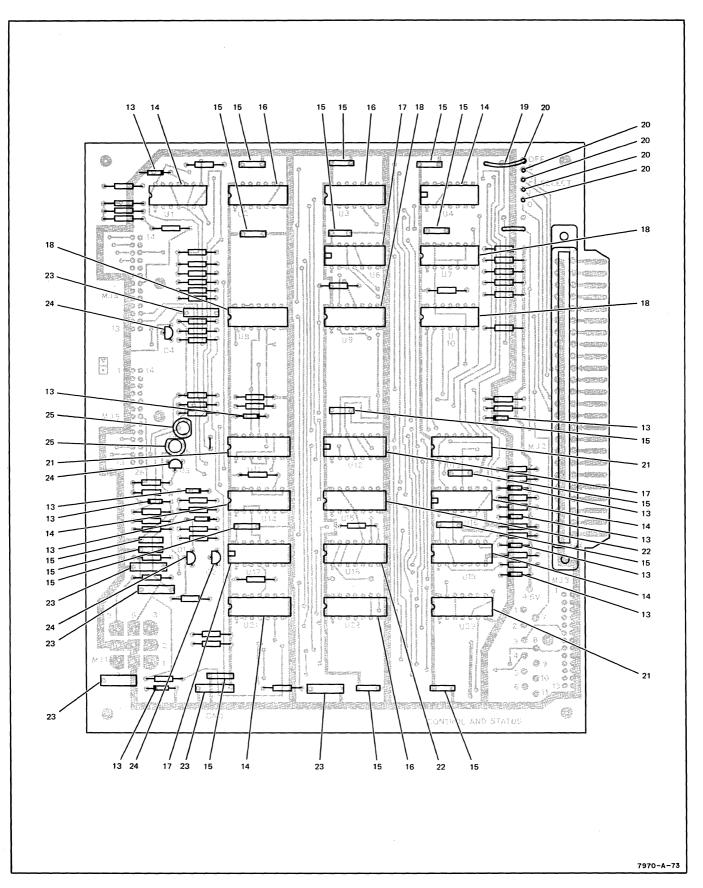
Control and Status PC Assembly A16 (Sheet 2 of 2)
